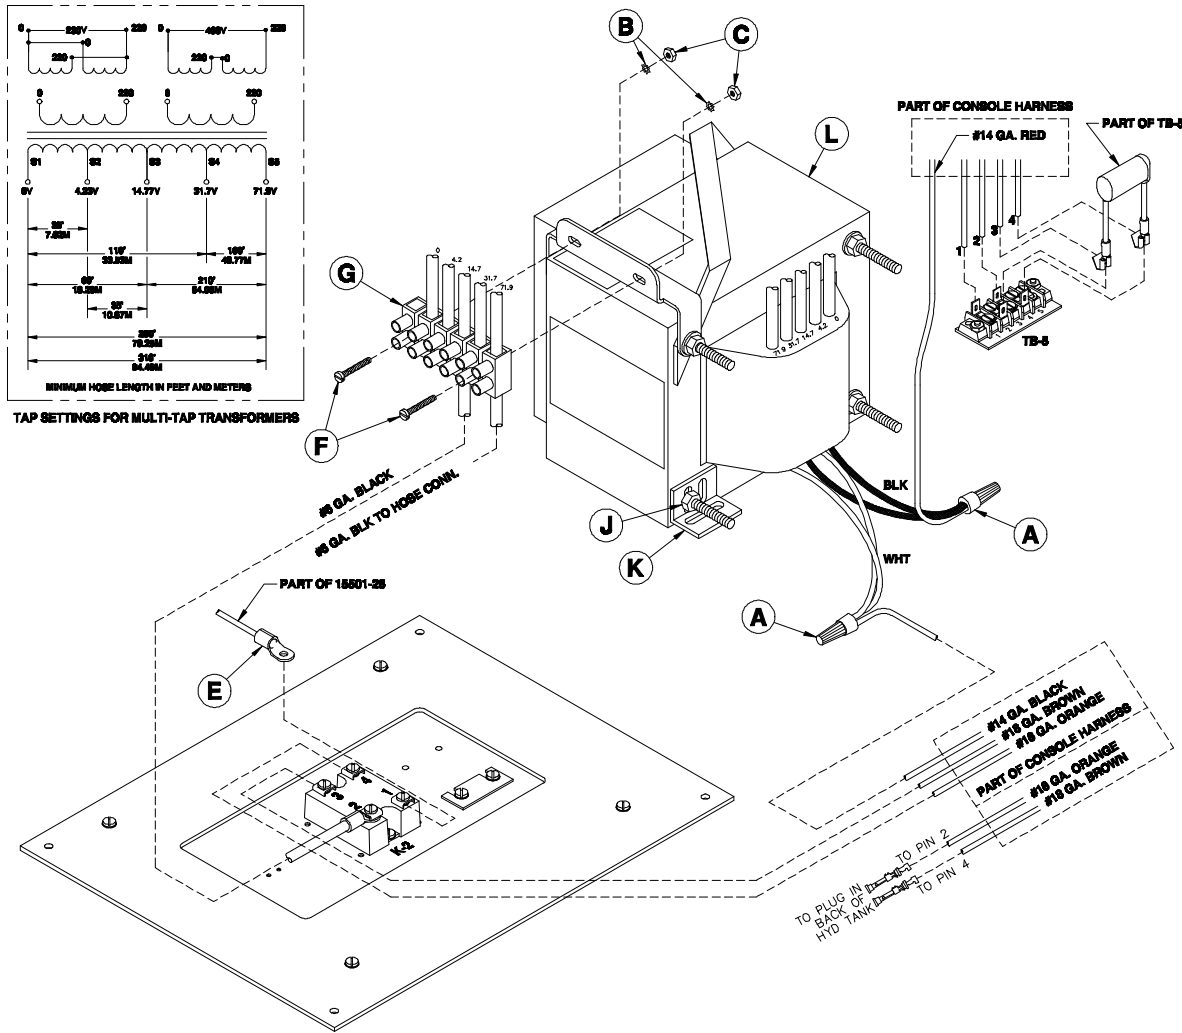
H-2000 (IHTC) Assembly (Part No. 15000-SIZE-IHTC) Exploded View Sheet 5 of 5
